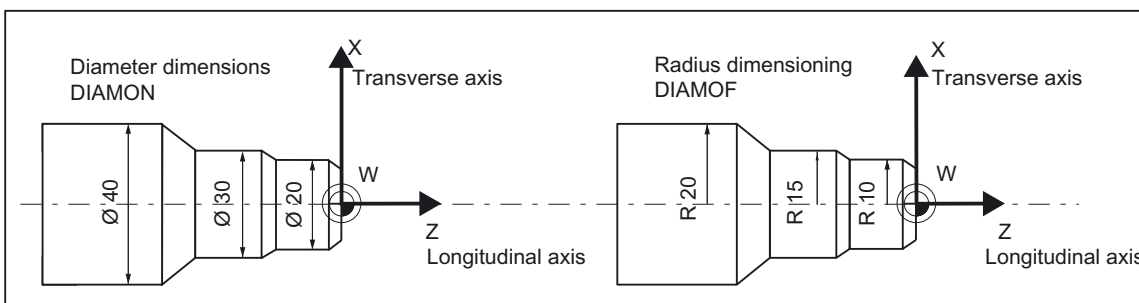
Diameter and radius dimensioning for the transverse axis
